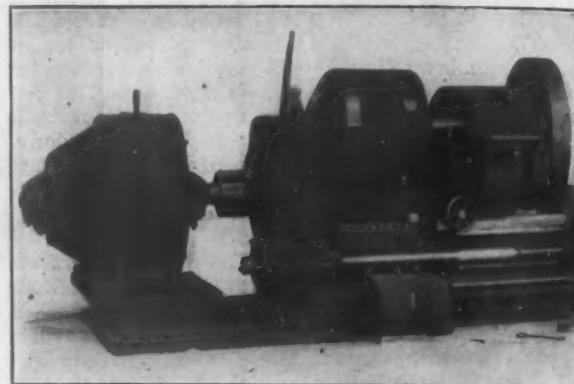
Complete Gear Guards for 36-in. Headstock.
